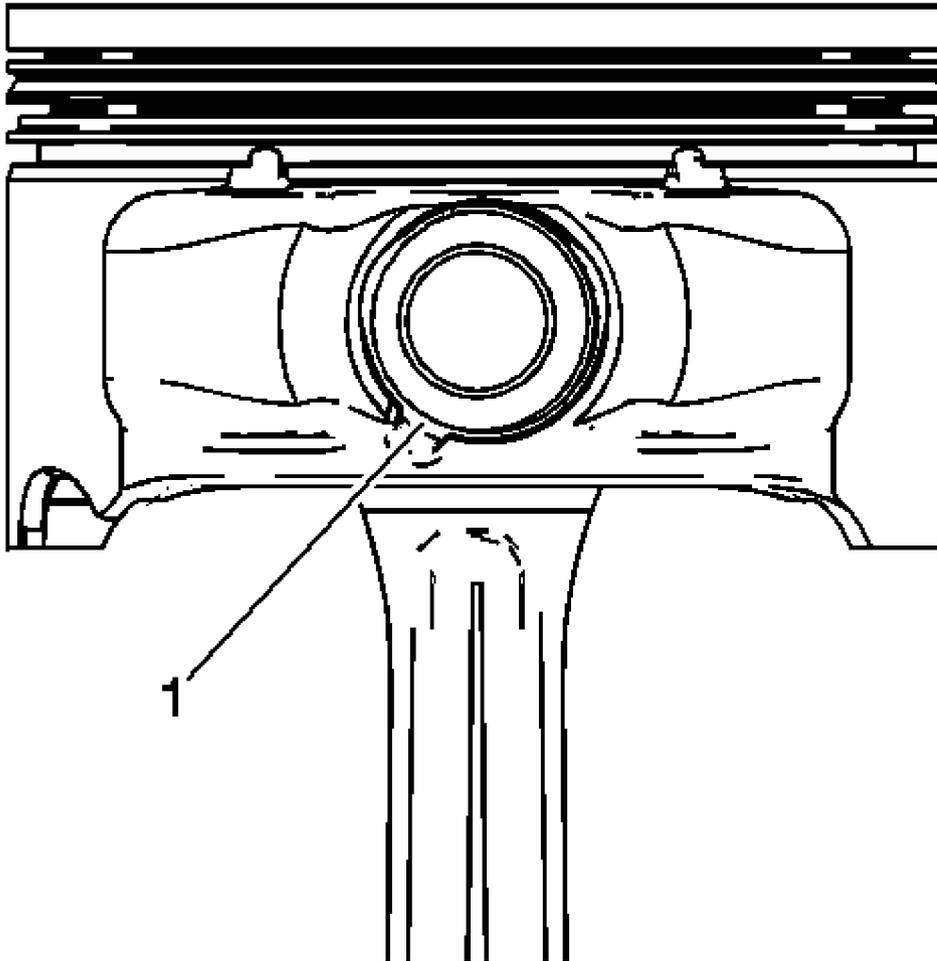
Identifying Piston Pin Retainers Removal Access Notch
